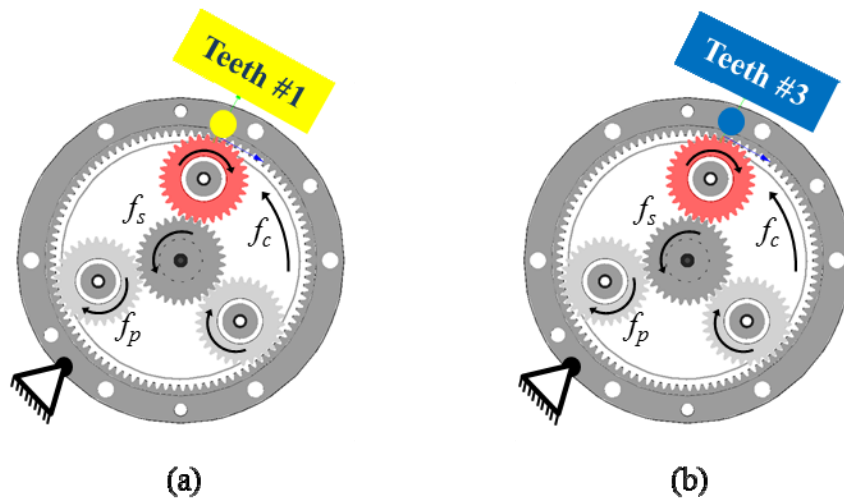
Teeth of the planet gear which is meshing with the ring gear
